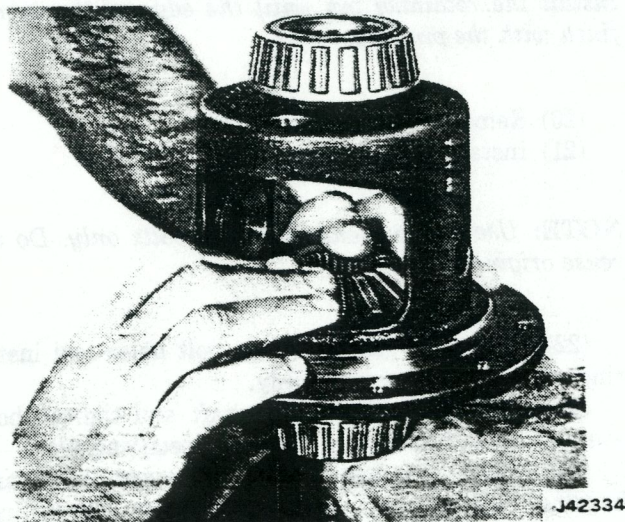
F-71 Mounting Differential Case on Axle Shaft
